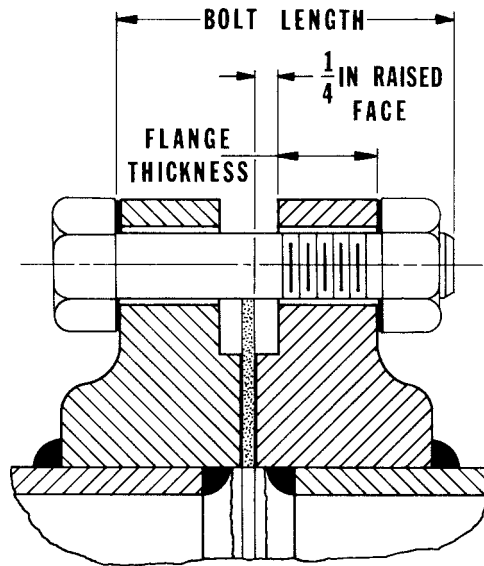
Flange Bolt Assembly for 400-psi and Above Flanges
